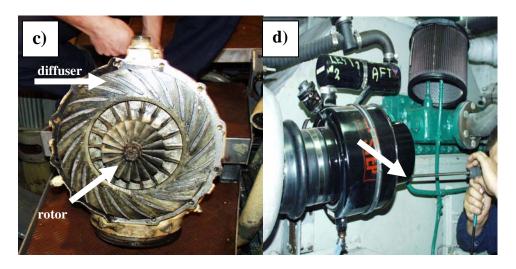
,d. The way of introducing the inspection endings of the boroscope and fiberoscope into internal spaces of the turbocharger; c) the M401 engine's investigation – the view of the compressor dismantled from the engine, d) the 16V149TI Detroit Diesel engine's investigation – access to the compressor's rotor after the air filter's disassembling.
